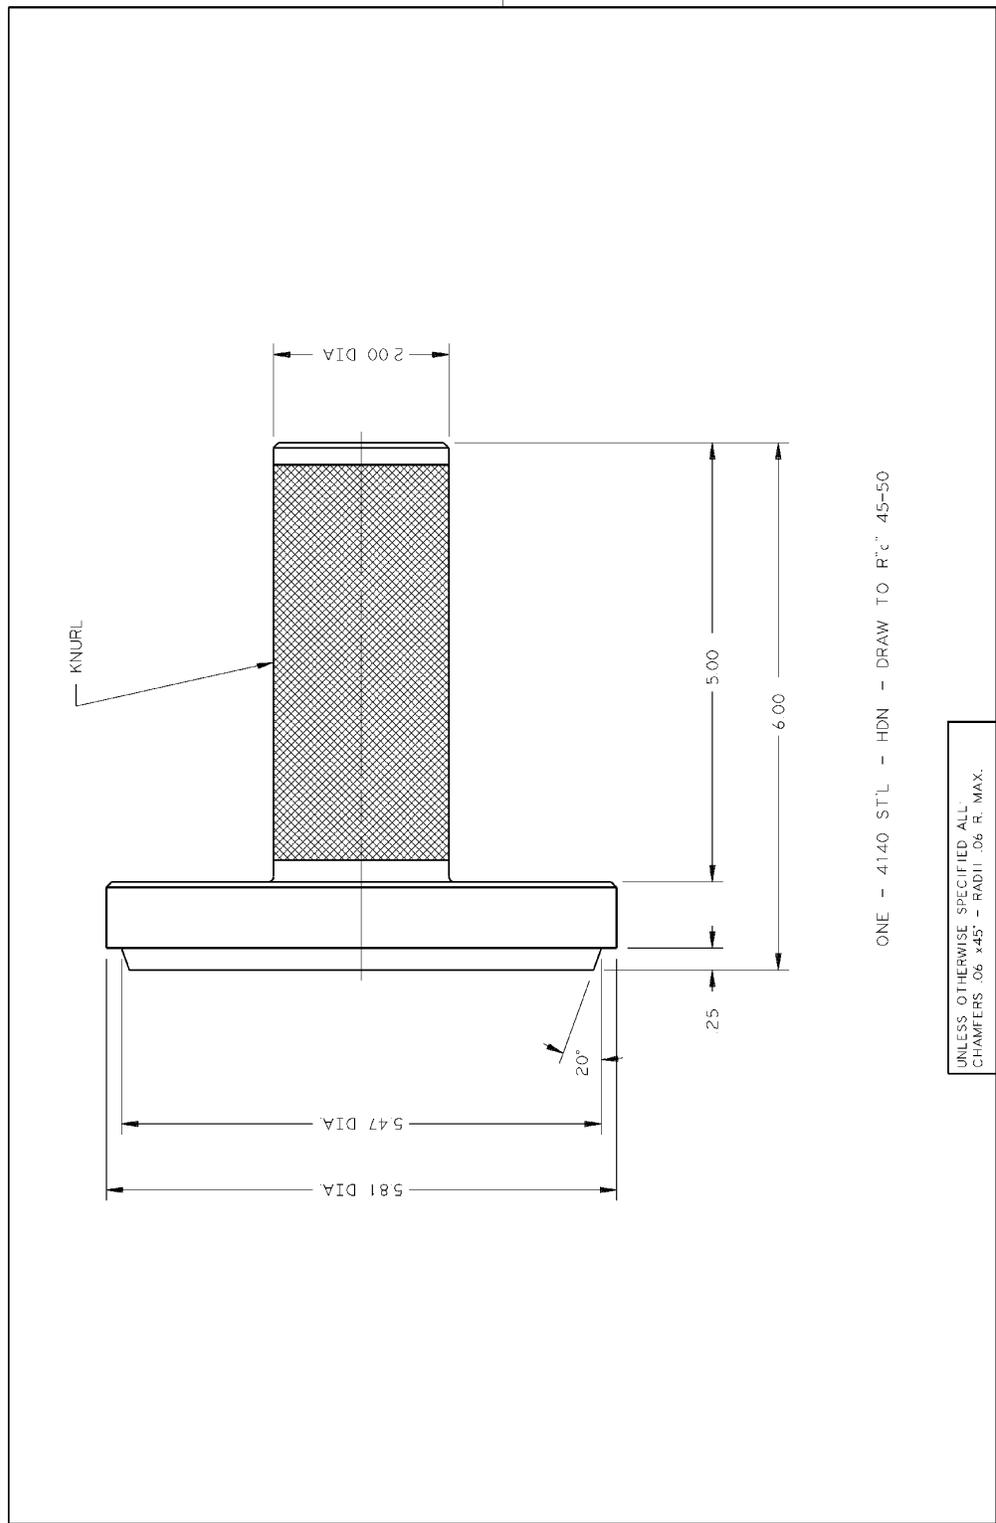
Assembly Tools - Bearing Cup Pressing - "A" & "B" Bearings
